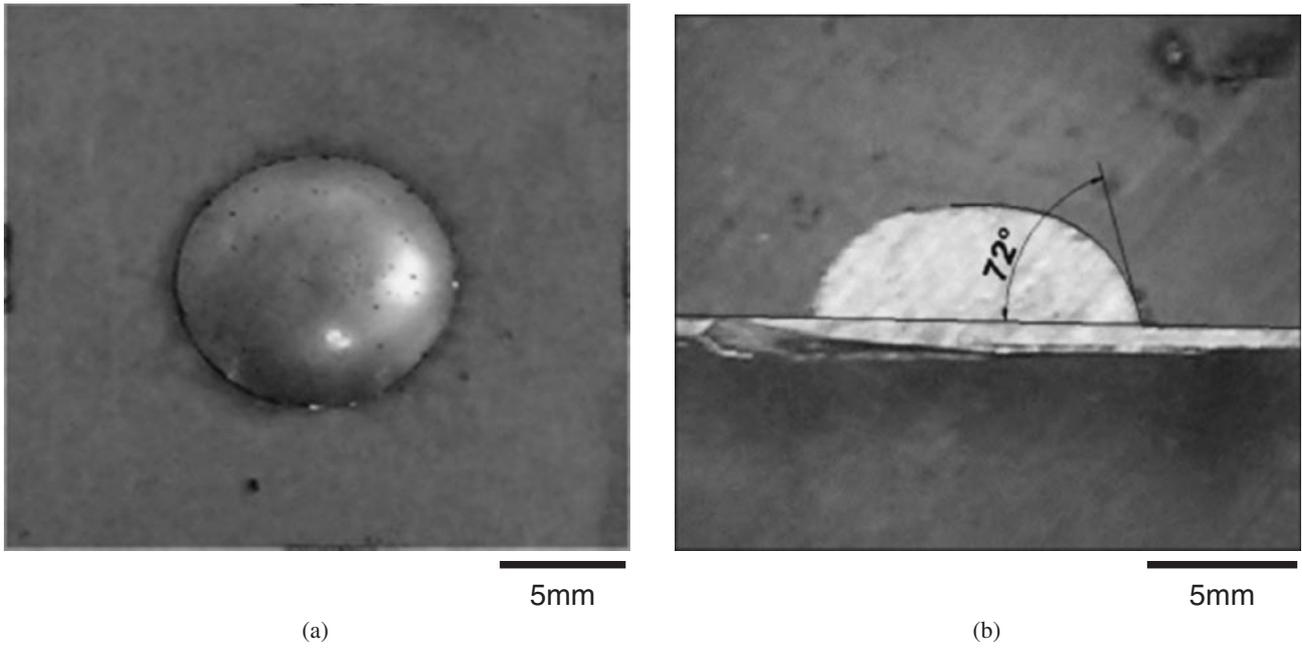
Contact angle measurement. a) Solder on copper substrate, b) Cross-section.
